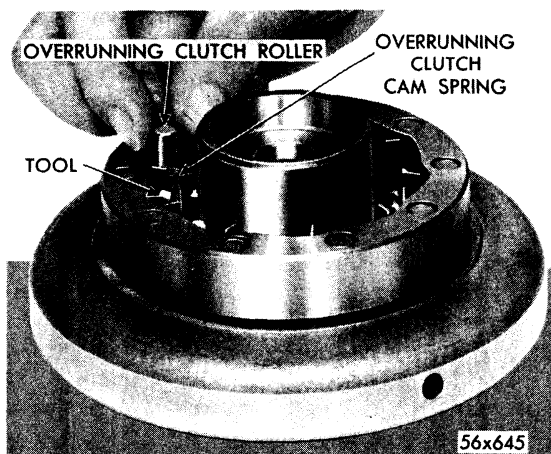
Installation of Overrunning Clutch Rollers and Springs in Intermediate Support and Cam Assembly
